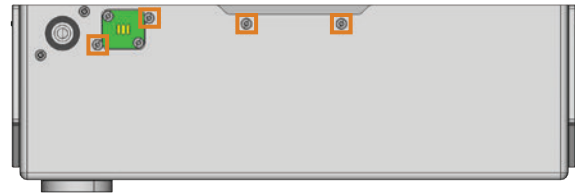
BACKSIDE OF THE COOLING LIQUID TANK
